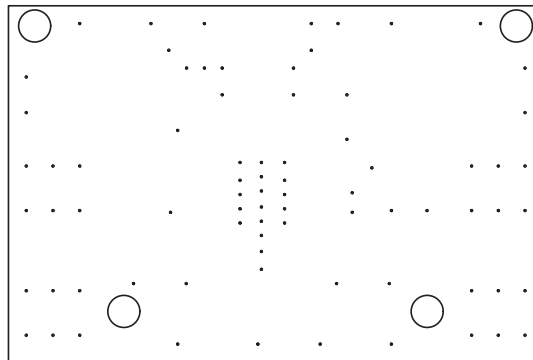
SKY65045 Evaluation Board Assembly Drawing
